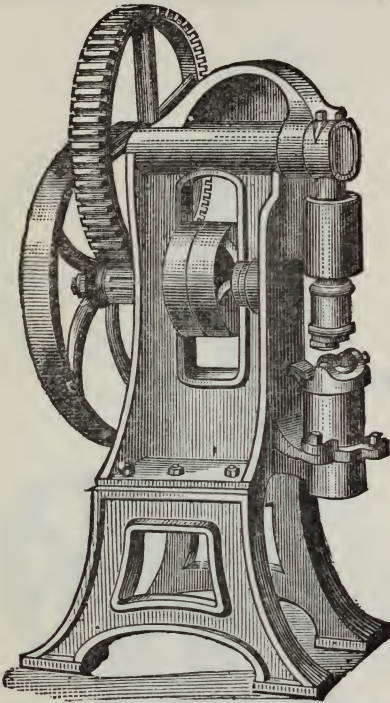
HEEL COMPRESSING OR MOULDING MACHINE.
